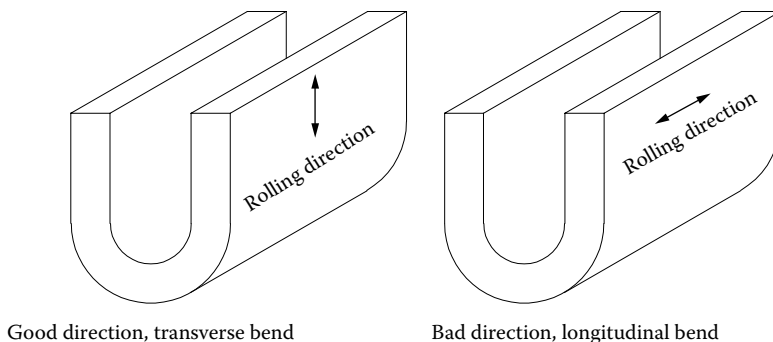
Optimum forming orientation for severe bending of plate steel.
